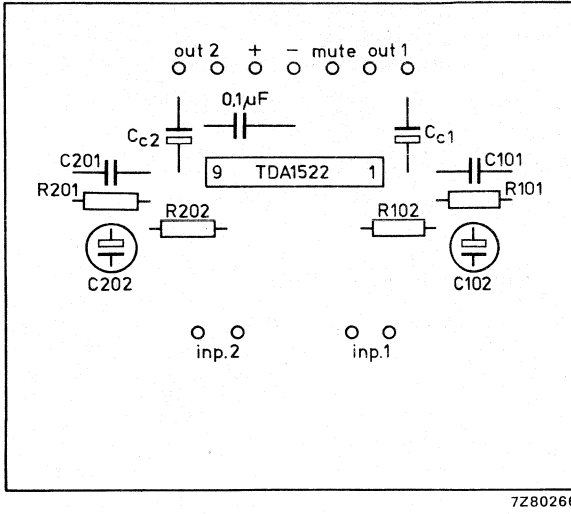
Printed-circuit board component side, showing component layout for circuit of Figure 1.
